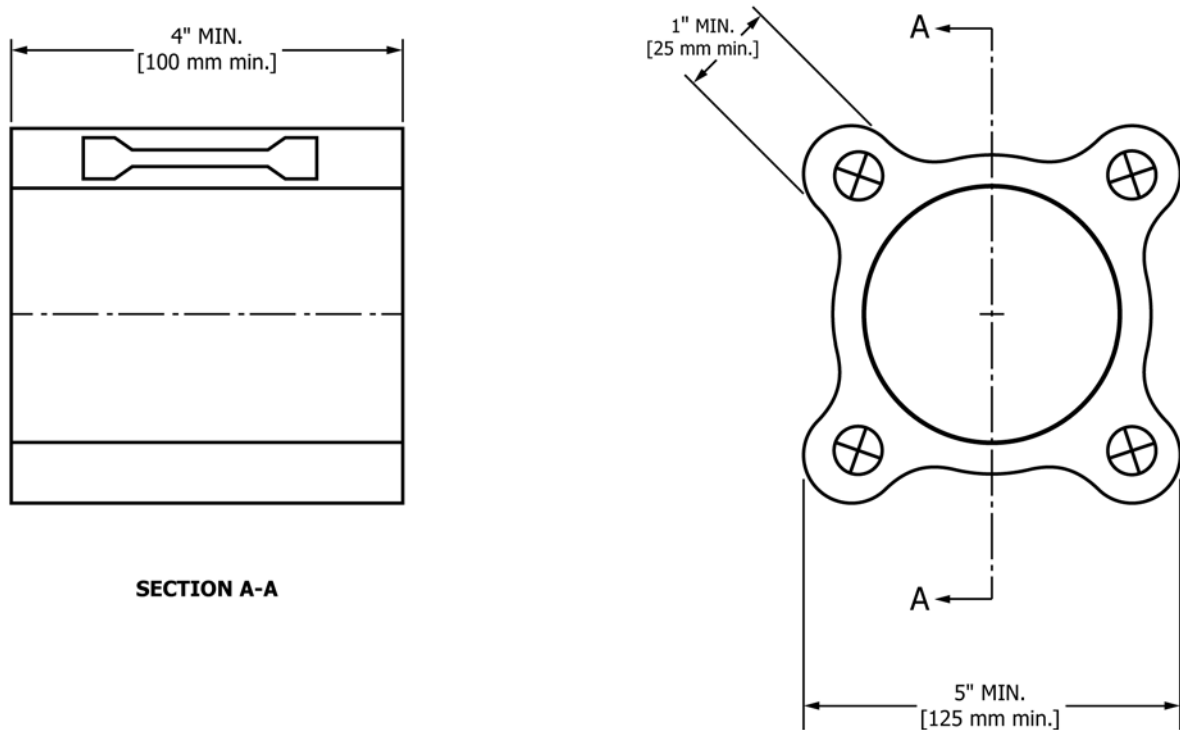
Optional Configuration Cast Centrifugal Test Block with Location of Machined Test Specimen.
